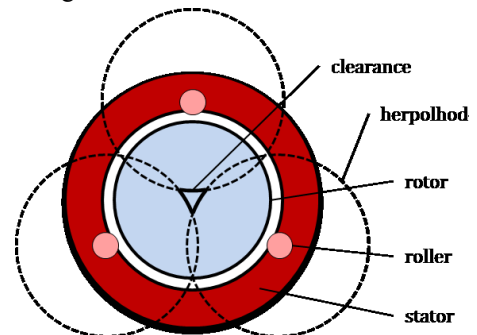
Schematic illustration of the clearance build with 3 BB units
